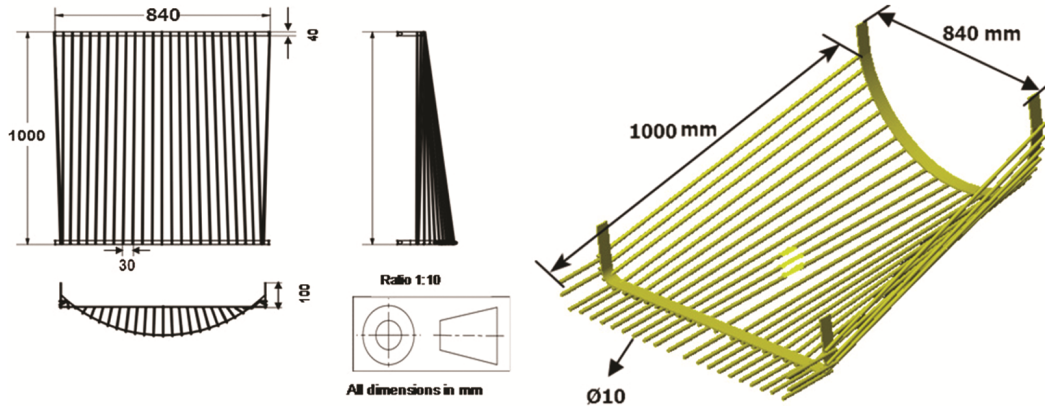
Orthographical and Isometric view of soil separating unit of a tractor operated digger.
